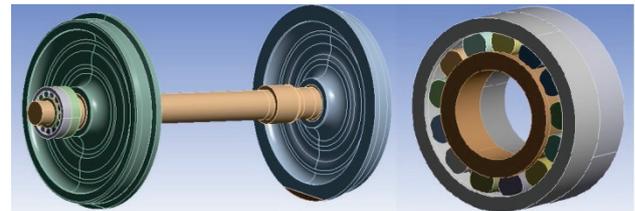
Model of the wheel assembly and the cylindrical roller bearing
